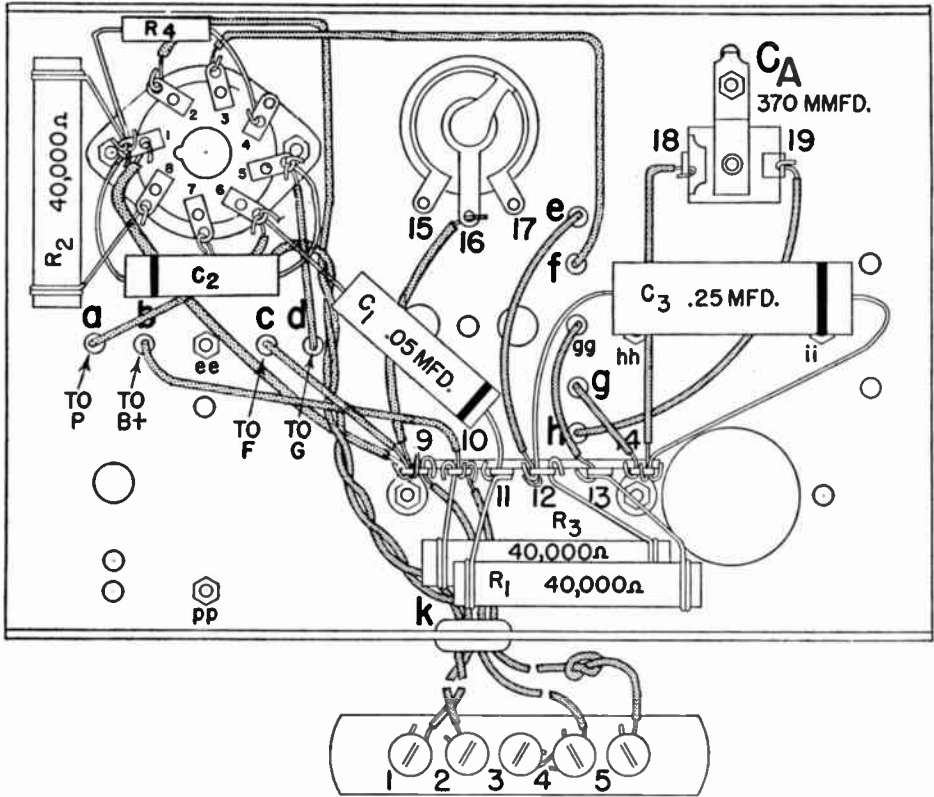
Bottom view of the r.f. chassis, showing how it should appear after you have assembled the grid-modulated r.f. oscillator according to the instructions given in Step 1 of Experiment 50.
